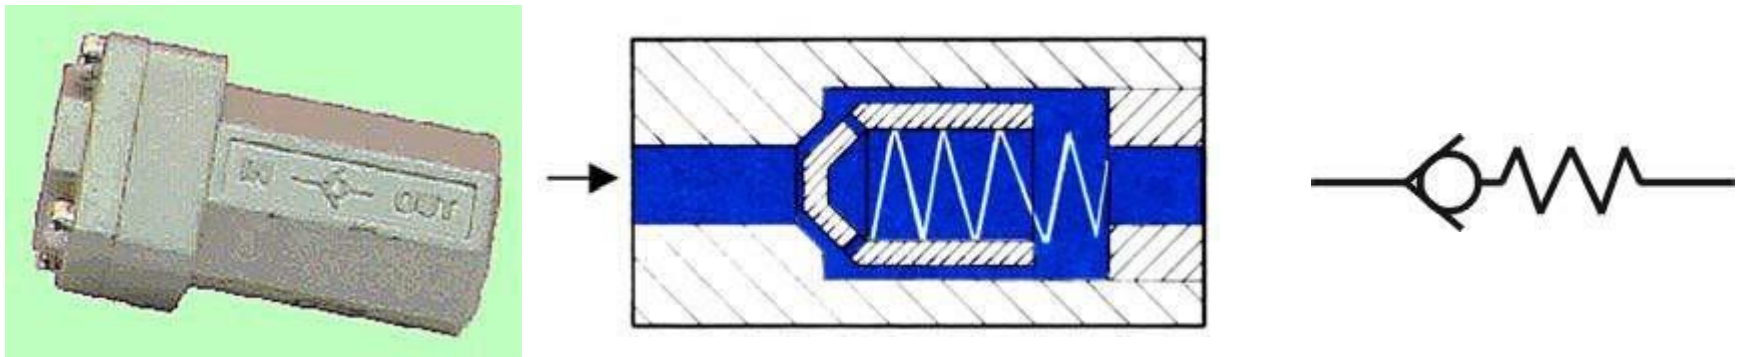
(a) Non-return valve (b) Cross section (c) Pneumatic symbol
